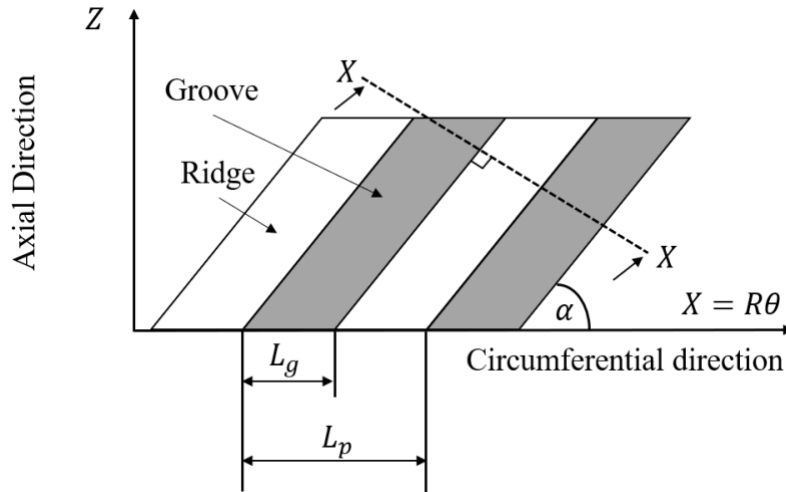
Schematic of a close-up view of a herringbone groove design with key geometry features identified
